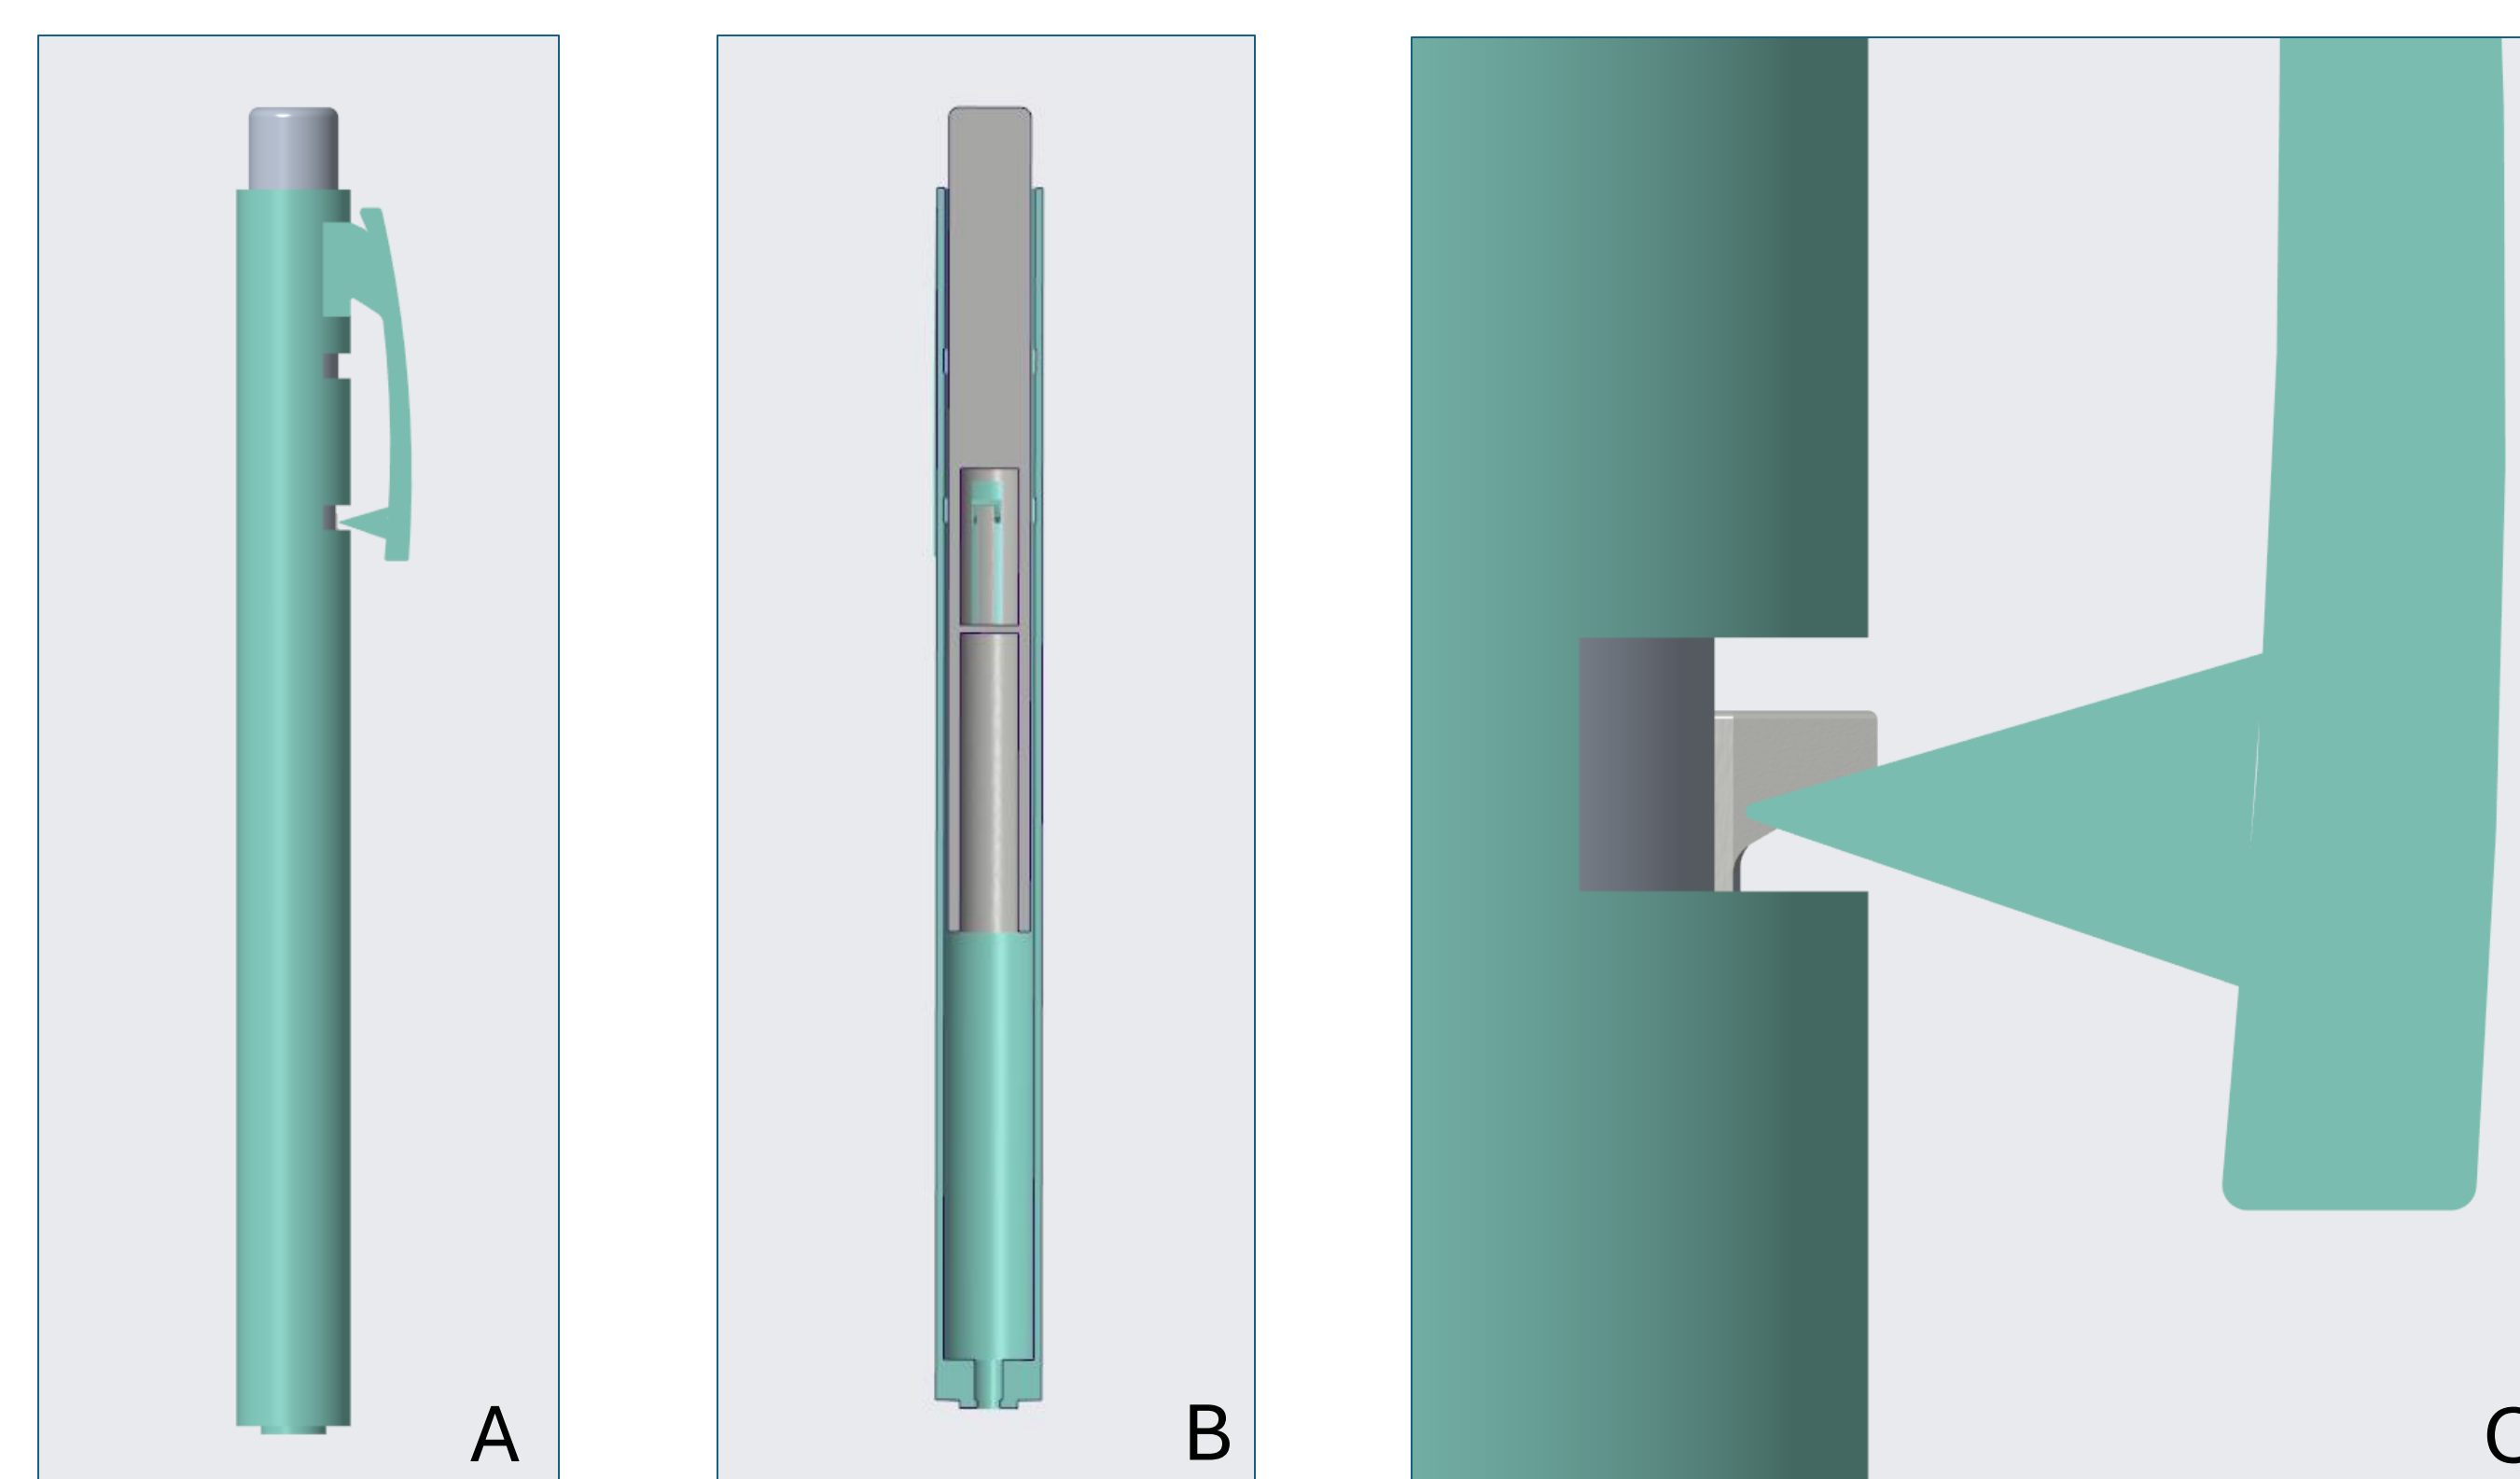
Final prototype of the automated skin punch biopsy tool. (a) Full assembly of the device including the main body and plunger components. (b) Section view of the tool showing the internal arrangement of the plunger, locking features, and sample collection pathway. (c) Close up view of the locking mechanism illustrating how the plunger is secured and released during operation
